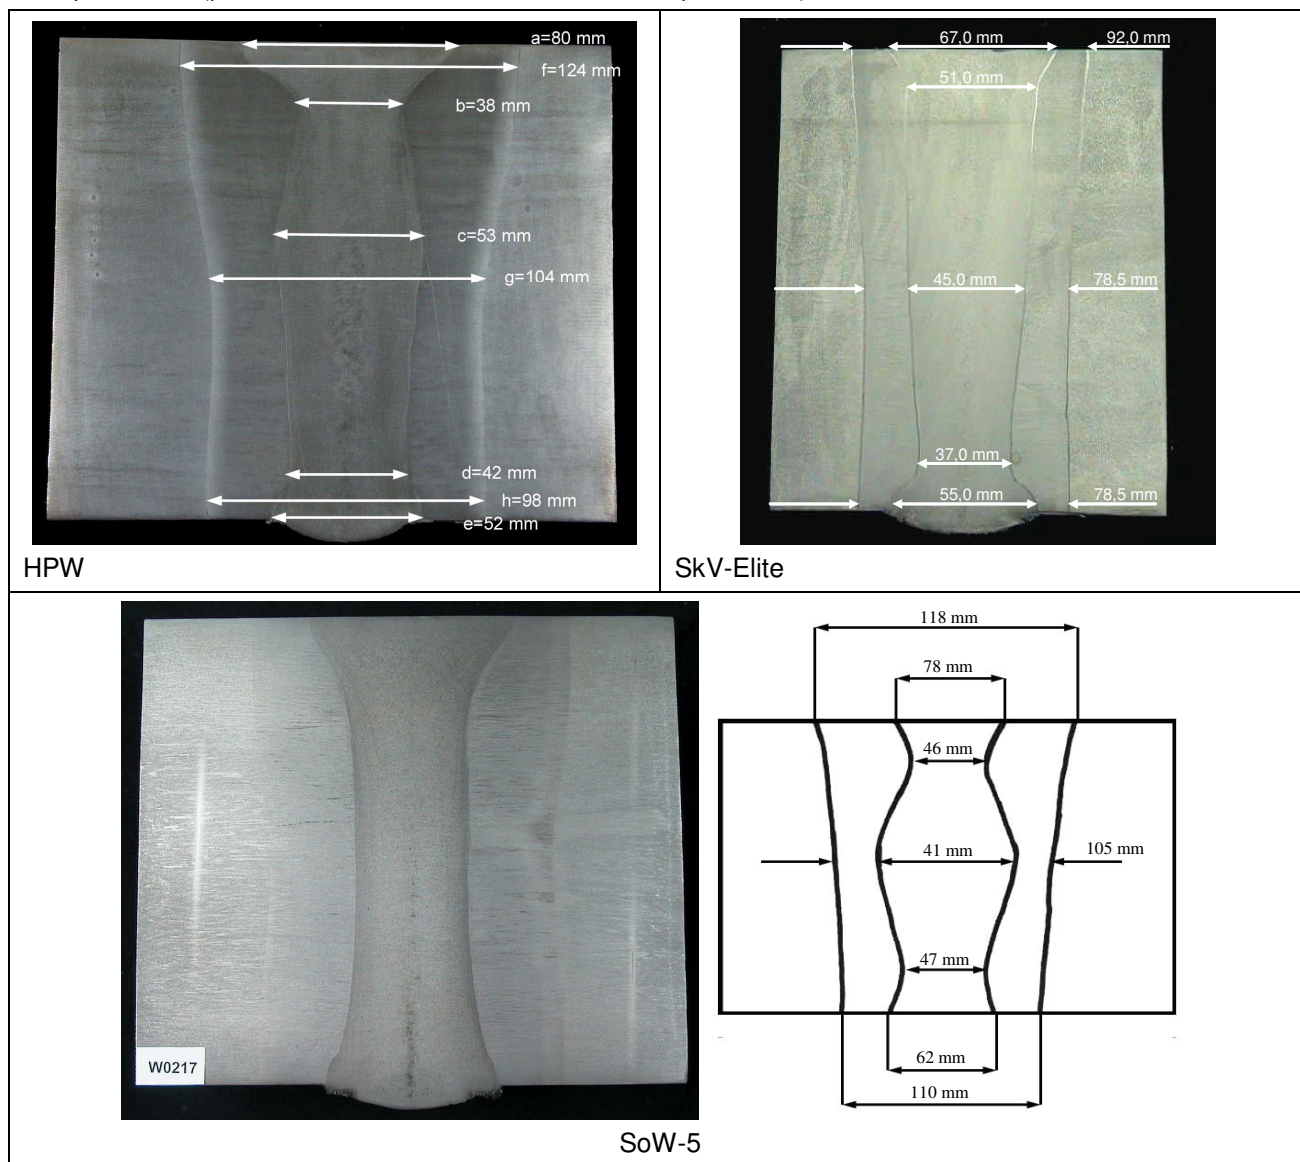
Shape and Geometry of Different Aluminothermic Welds
